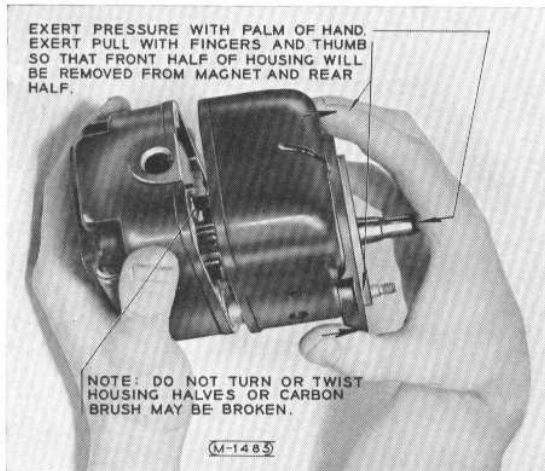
Removing the Front Section of the Housing from Magnet and Rear Section
